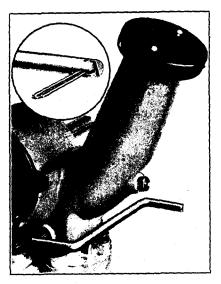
Inserting Seat Pin in Fanshaft Driving Chain with Tool 56331
